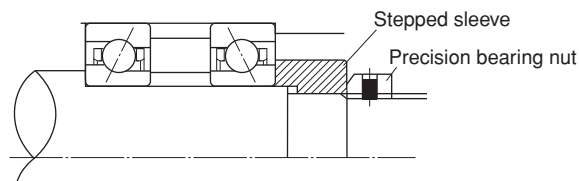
Tightening with stepped sleeve + precision bearing nut
